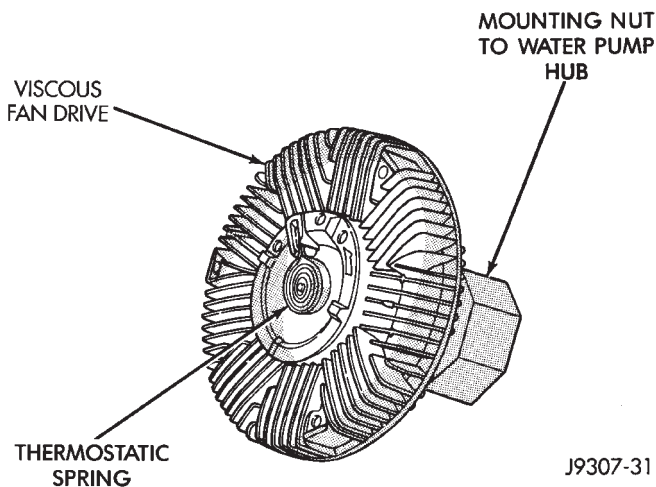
Viscous Fan Drive—5.2L Engine—Typical
